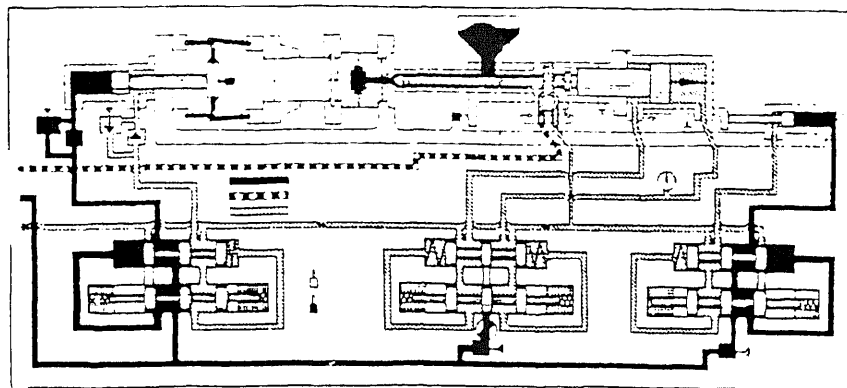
The mold cavities are filled; the cooling stage and the packing stage start; the screw starts to rotate.
